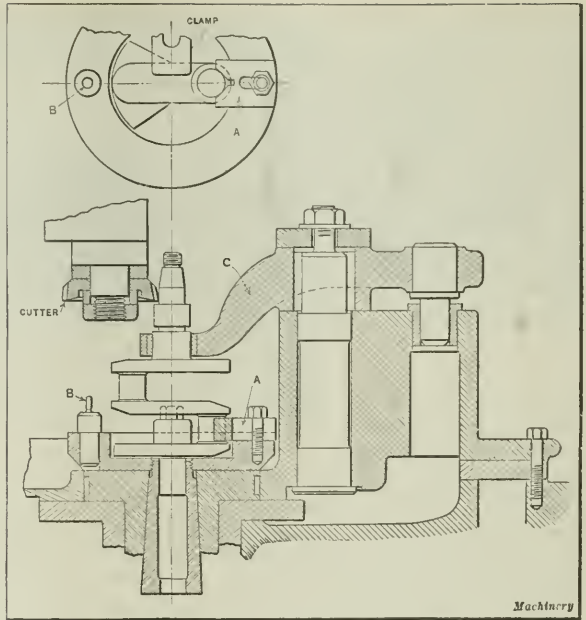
Method of holding Crankshaft while cutting Gear Near Upper End
